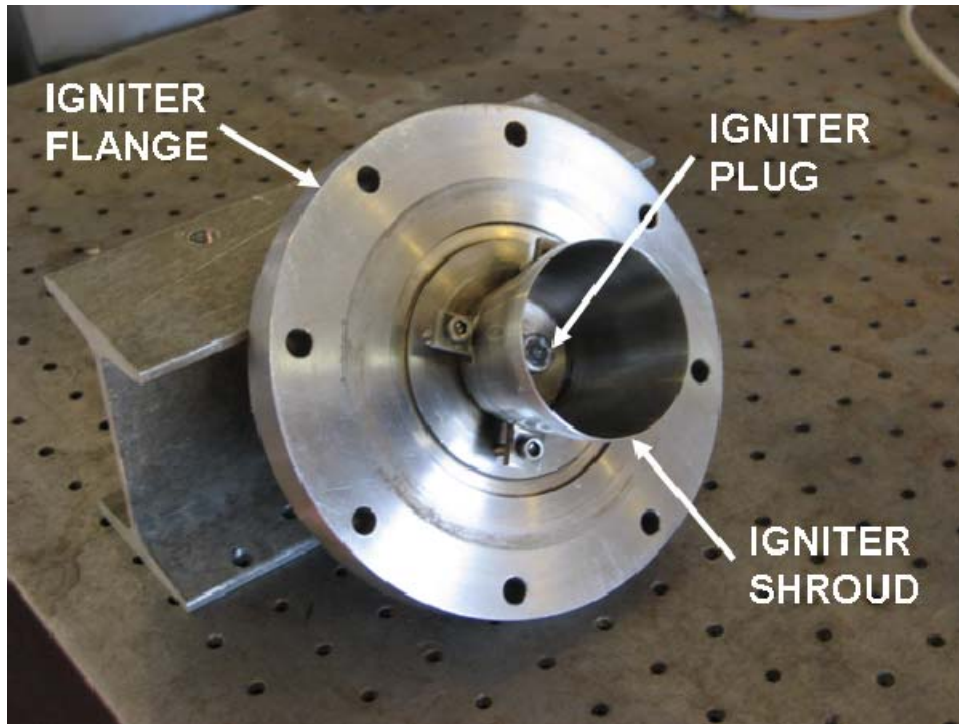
Igniter Flange with Shroud and Igniter Installed (From [7])
